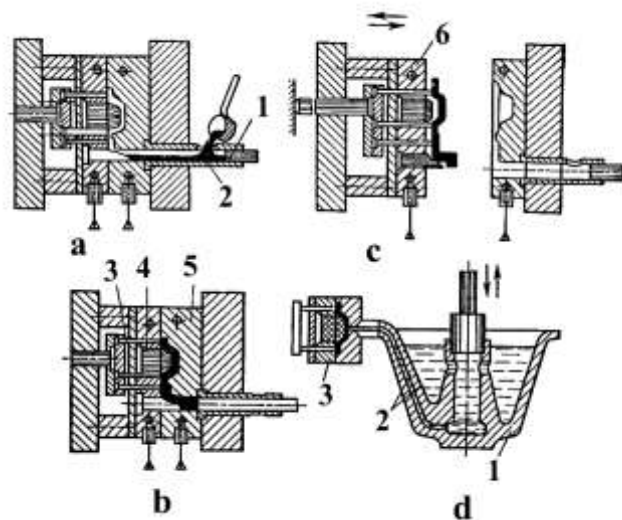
Plunger machines with cold (a, b, c) and hot (d) pressing chambers: a...c: 1- plunger; 2 – pressing chamber; 3 – pusher; 4 – metallic core; 5 – removable half-mould; 6 – irremovable half-mould; d: 1 – heating crucible; 2 – metal-conductor; 3 – press-mould
